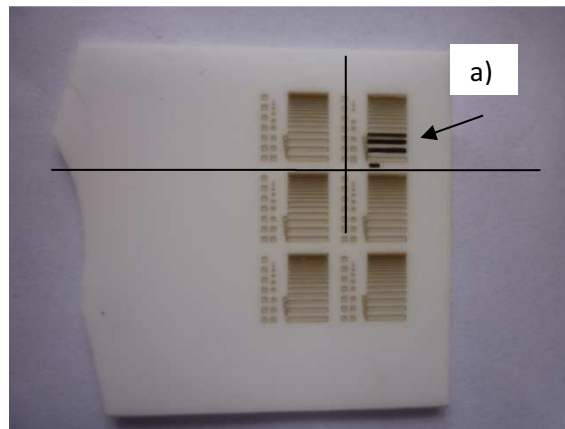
Microscope image of six laser machined arrays on alumina substrate
